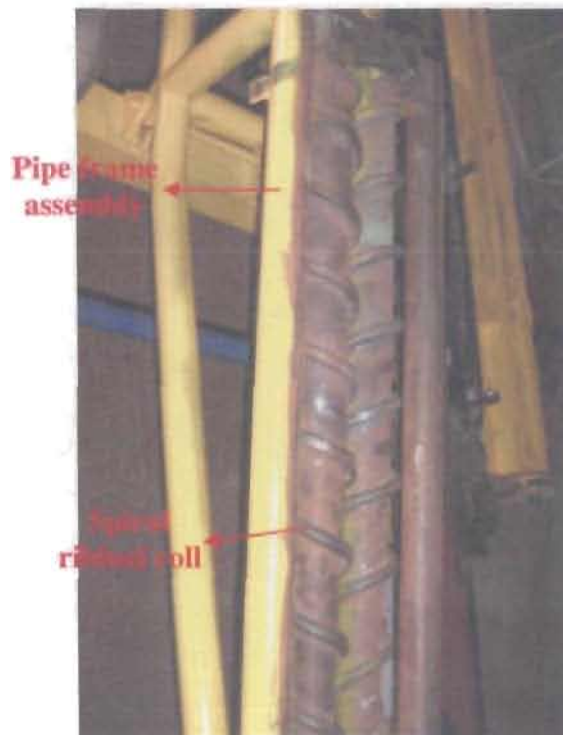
A view of pipe frame fabricated for snapping roll assembly
